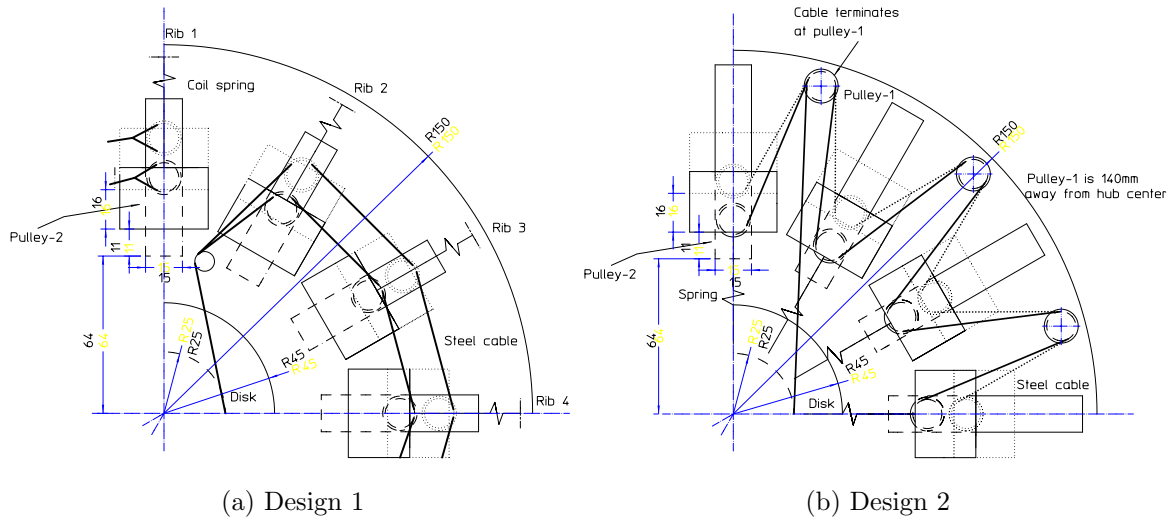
Two hub mechanism designs (dimensions in mm).
